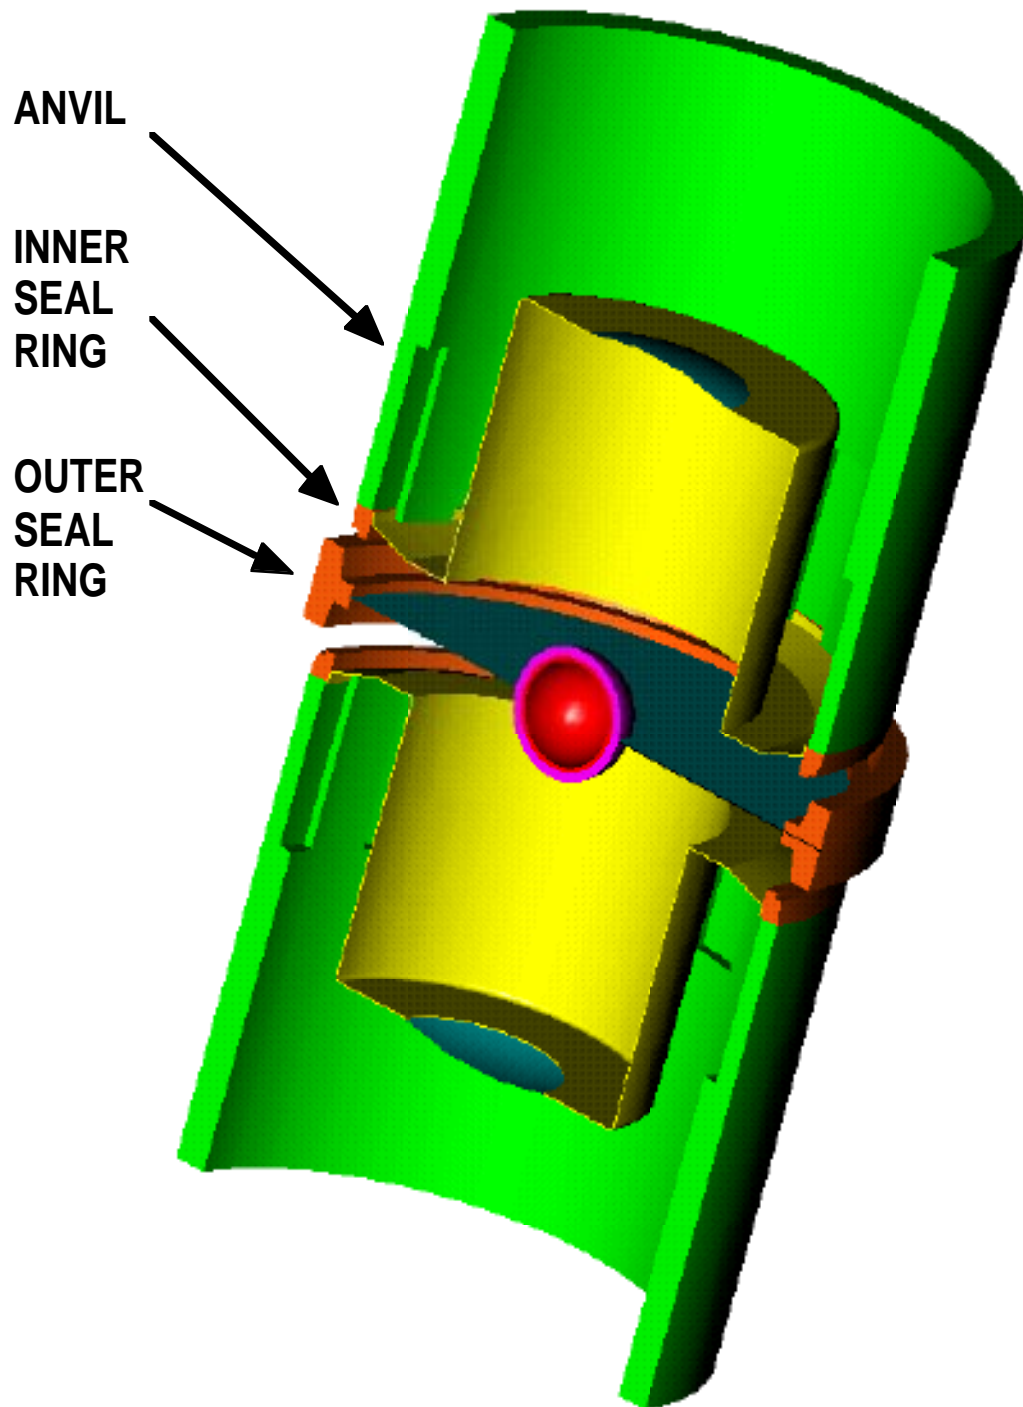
The CAH target design has been modeled in a 3D solid CAD program and is shown with a half section removed. The anvils are part of the assembler mechanism that will build the hohlraum. They are not part of the target. The target is shown in this figure as it is being assembled, just before the inner and outer seal rings are joined. For scale, the outer diameter of the capsule is 2.22 mm.
